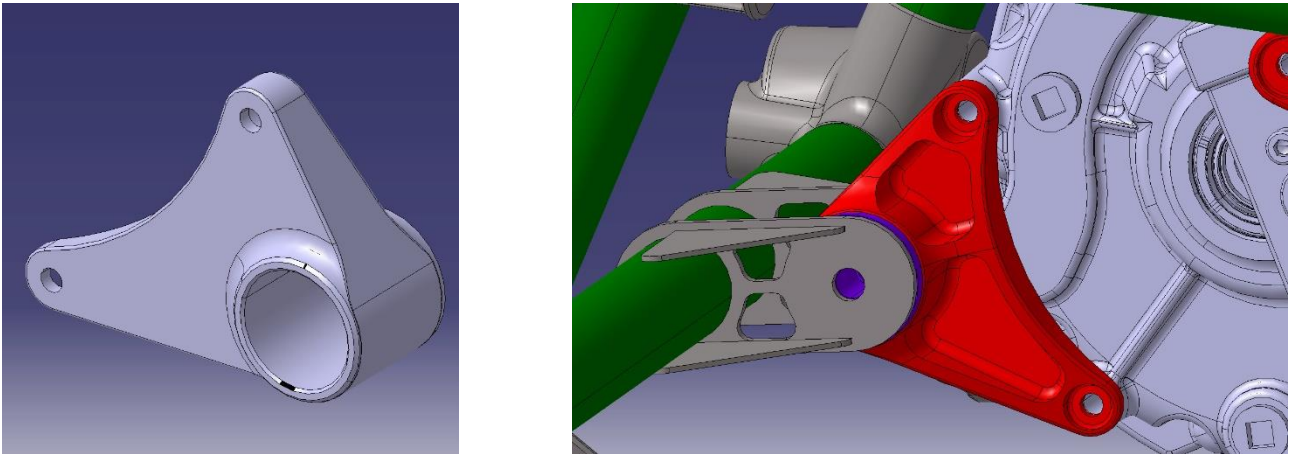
Left: Motor Rear Mount; Right: Fixed Motor Rear Mount.
